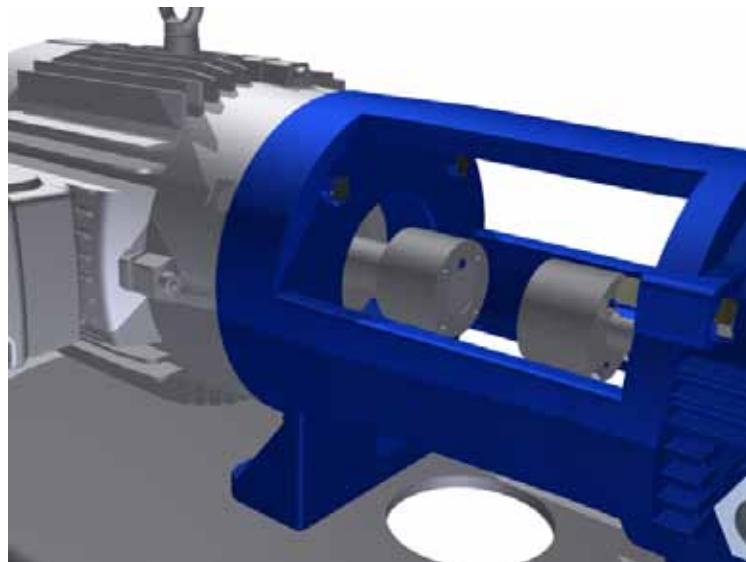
Securing the C-Face motor (driver) to the C-Frame.
